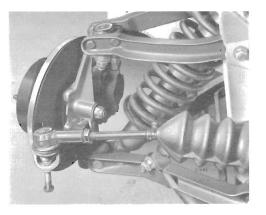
Using Tool No. S.160 to remove tie-rod end from steering lever
